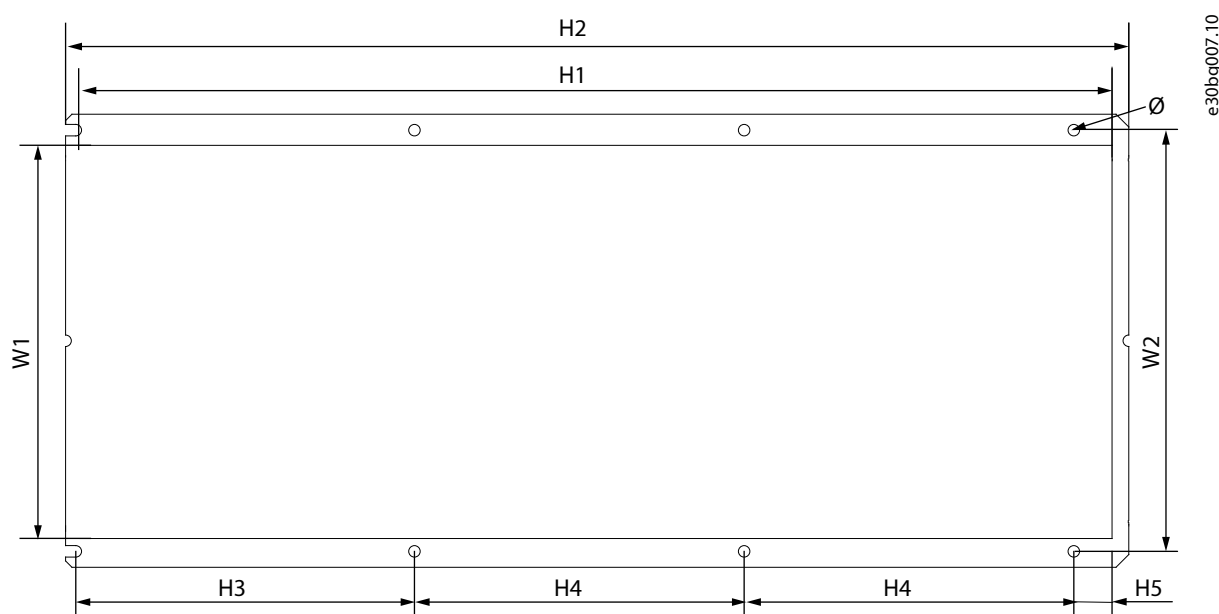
Dimensions of the Opening and Drive Outline with Flange, FI8
